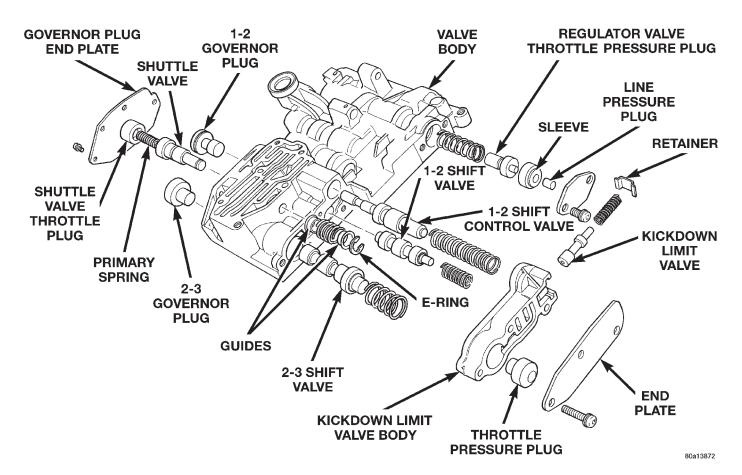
Control Valves, Shift Valves, And Governor Plugs
